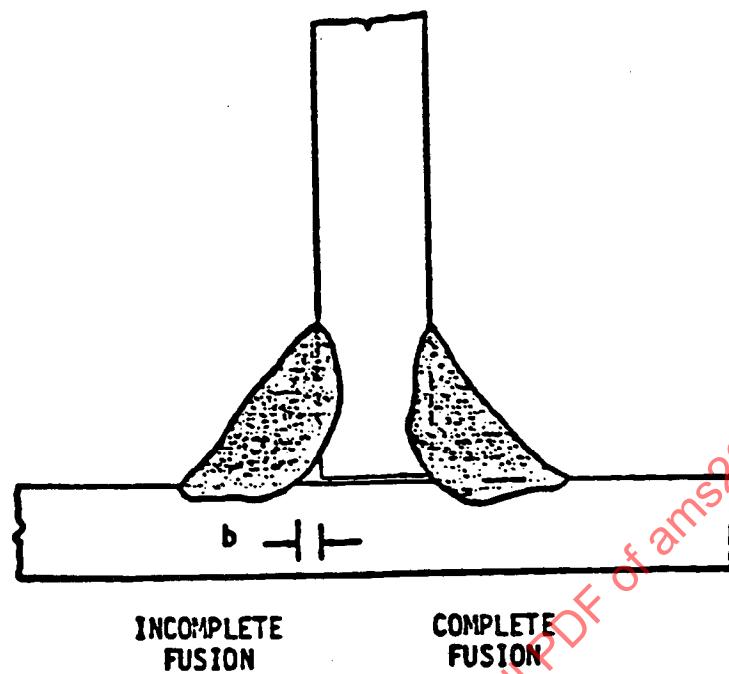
COMPLETE AND INCOMPLETE FUSION IN FILLET WELDS
